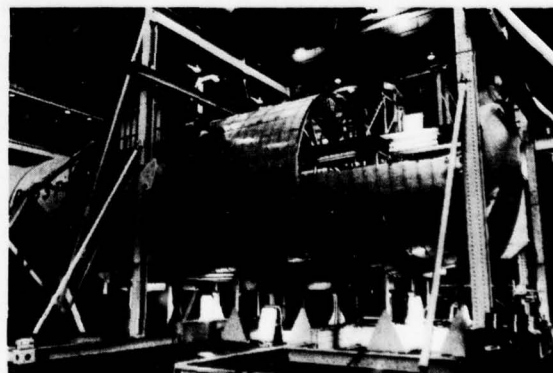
FINAL ASSEMBLY MINUS THREE PANELS, LOWER VIEW
